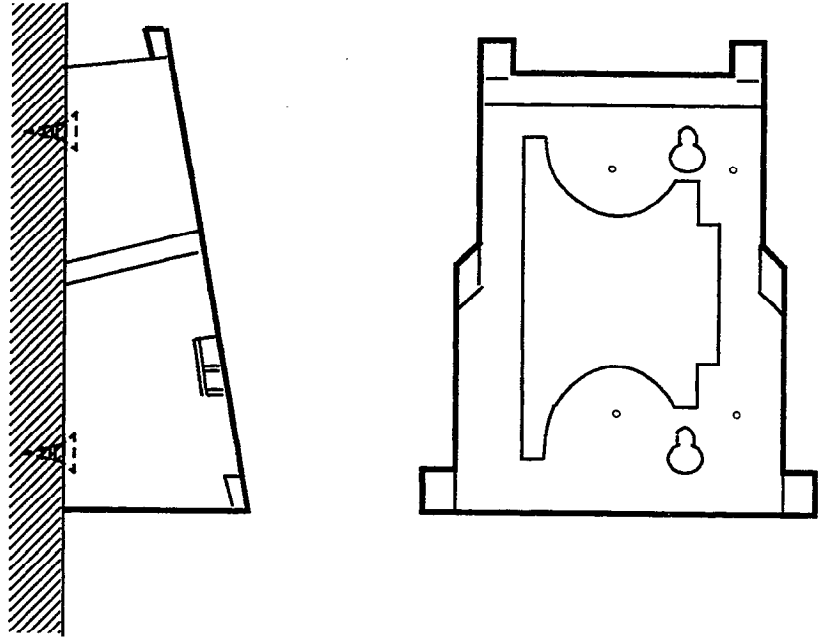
Fastening the WMU-W (BK)/(SW) Unit to the Wall
